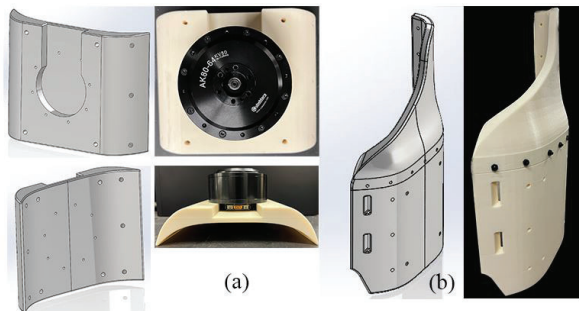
(a) CAD model and 3D printed hip connector part with AK80-64 Brushless DC motor mounted on, and (b) CAD model and 3D printed large trunk support component
